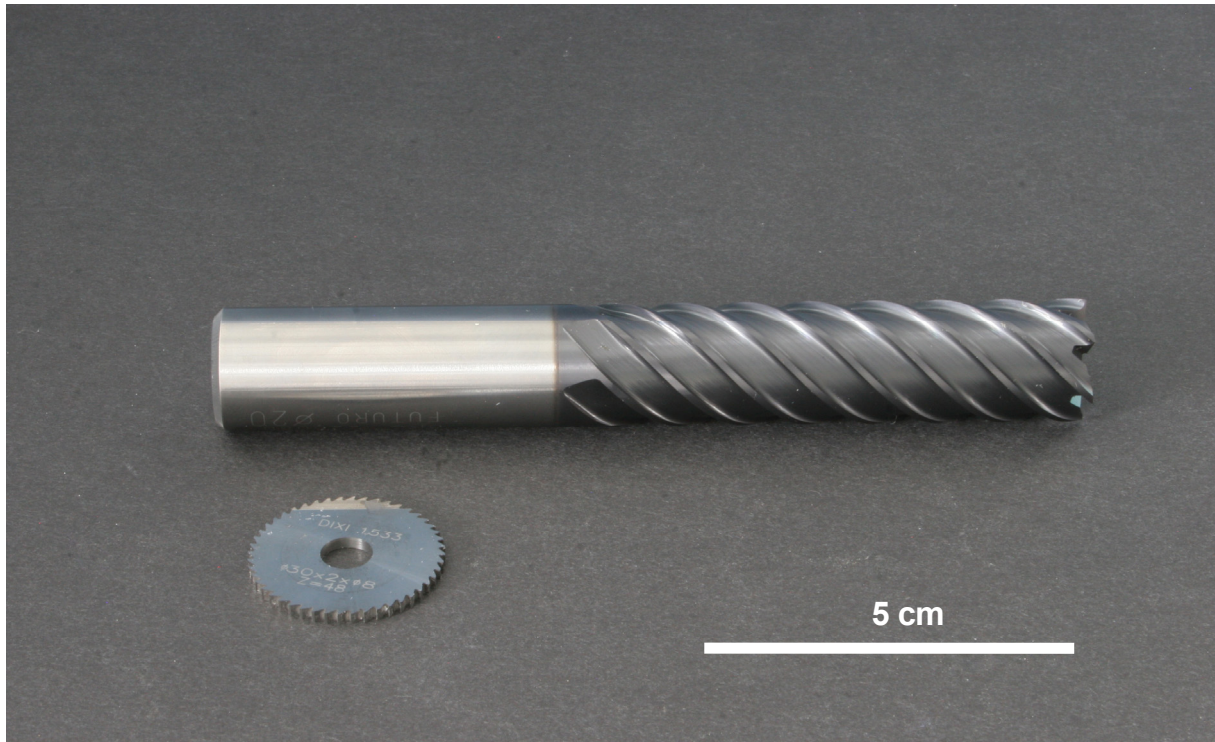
Machining tools: Top: Carbide metal hob with a diameter of 20 mm. Below: One of the side milling cutters employed to cut grooves into the slider base. Their width ranged from 0.1 to 3 mm (2 mm in figure) and the diameter of these tools was 30 mm.
